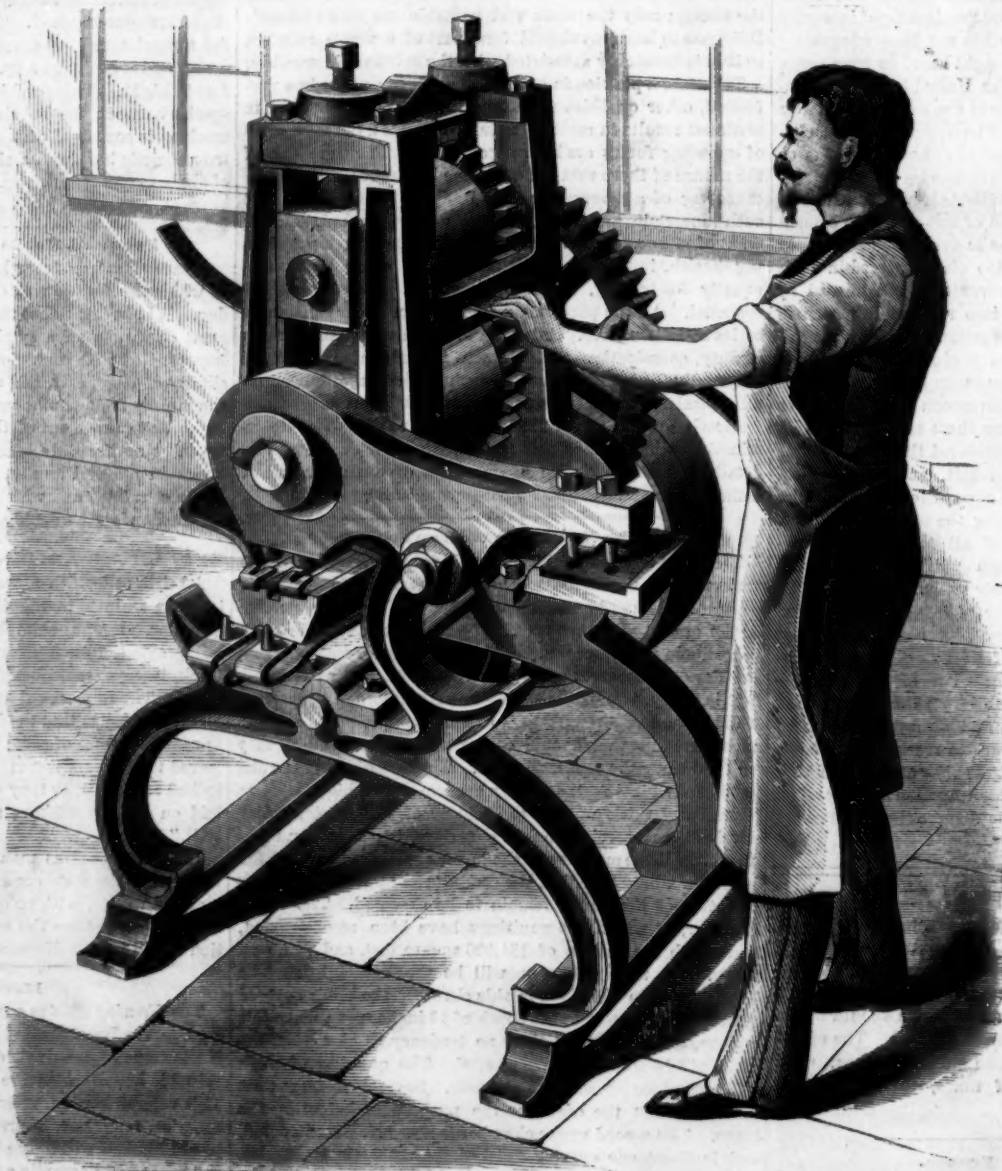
MACHINE FOR BENDING THE BARREL HOOPS.
